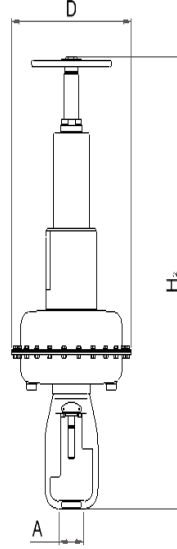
Diaphragm Actuator With Side Mounted Handwheel Direct/Reverse Acting.
